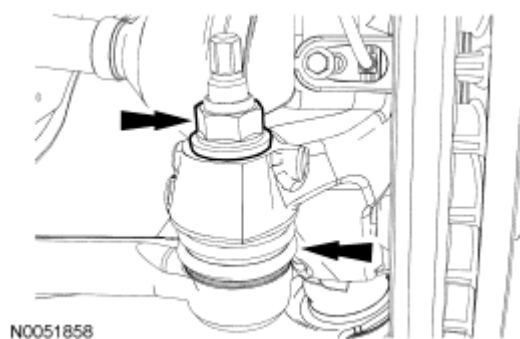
Identifying Tie-Rod End Nut And Wheel Knuckles
